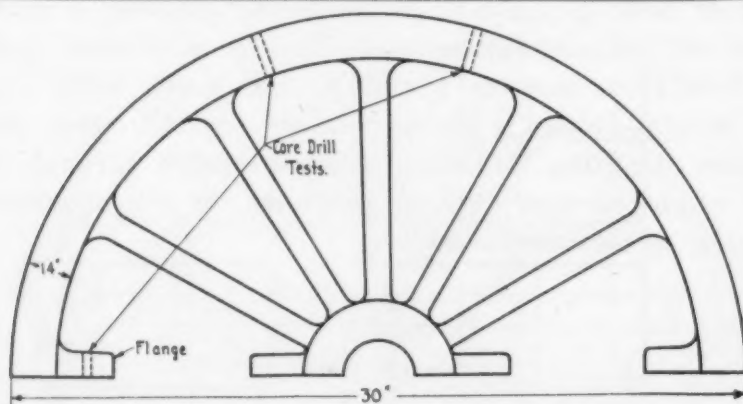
Split Flywheel Casting, Showing Location of Core Drill Tests.
